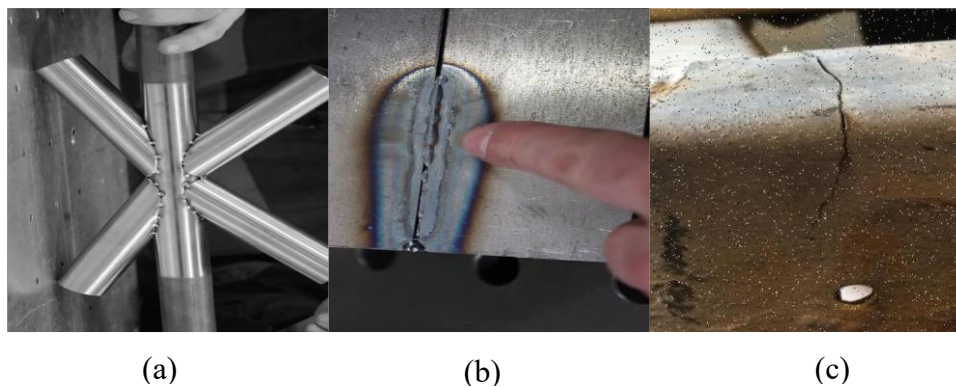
Images Samples (a) Good Weld, (b) Bad Weld, (c) Defect
